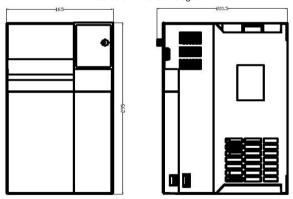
HE100 plastic 18-22KW structure external dimension and installation dimension diagram
